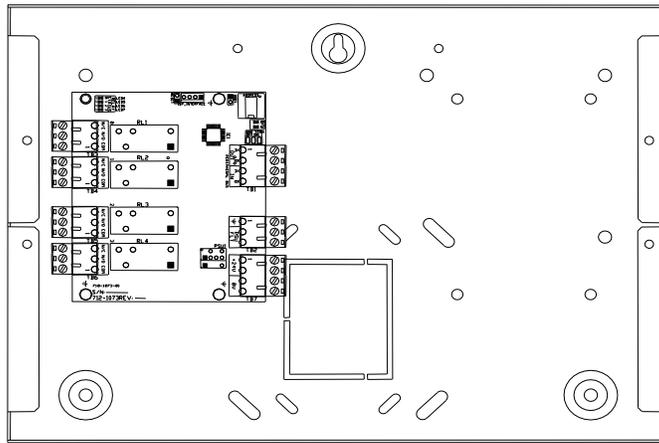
NX-EM-RL4 NX-FA-009 Enclosure Mounting
